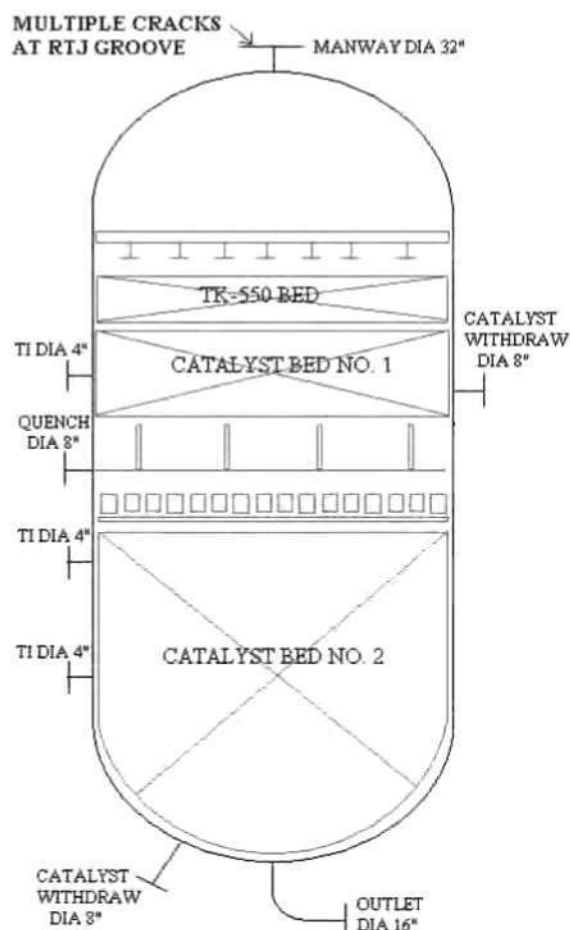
The cracks at RTJ groove in the schematic drawing of Reactor
